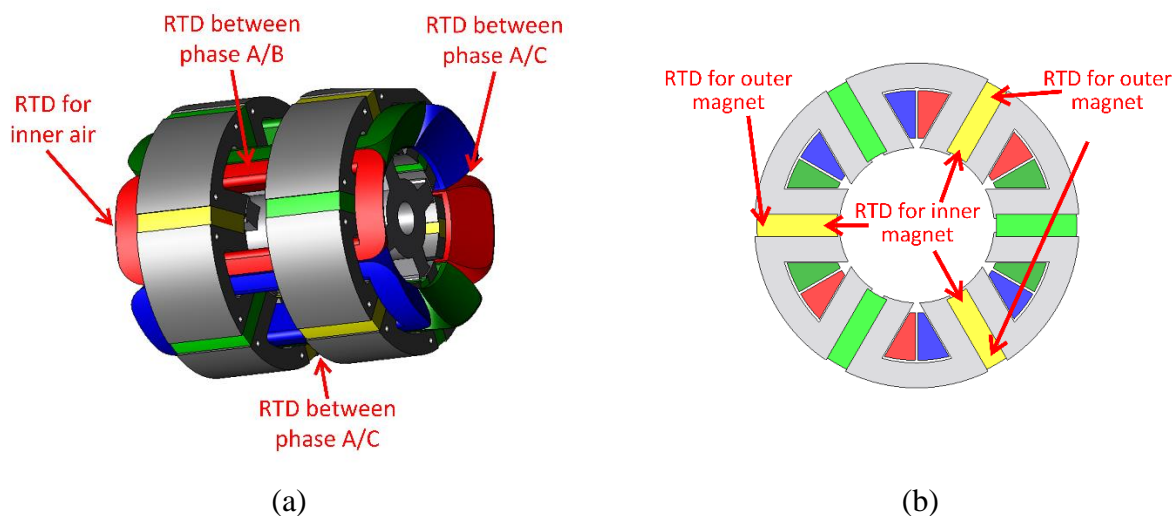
Placement of 10 RTD temperature sensors in the DLCW 6/4 FSPM machine prototype
